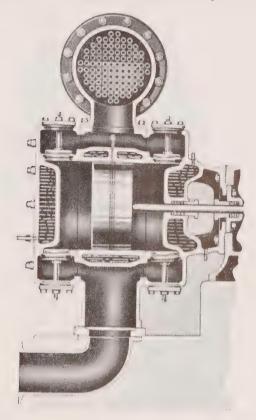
Cross section of air cylinder and intercooler of air compressor.
